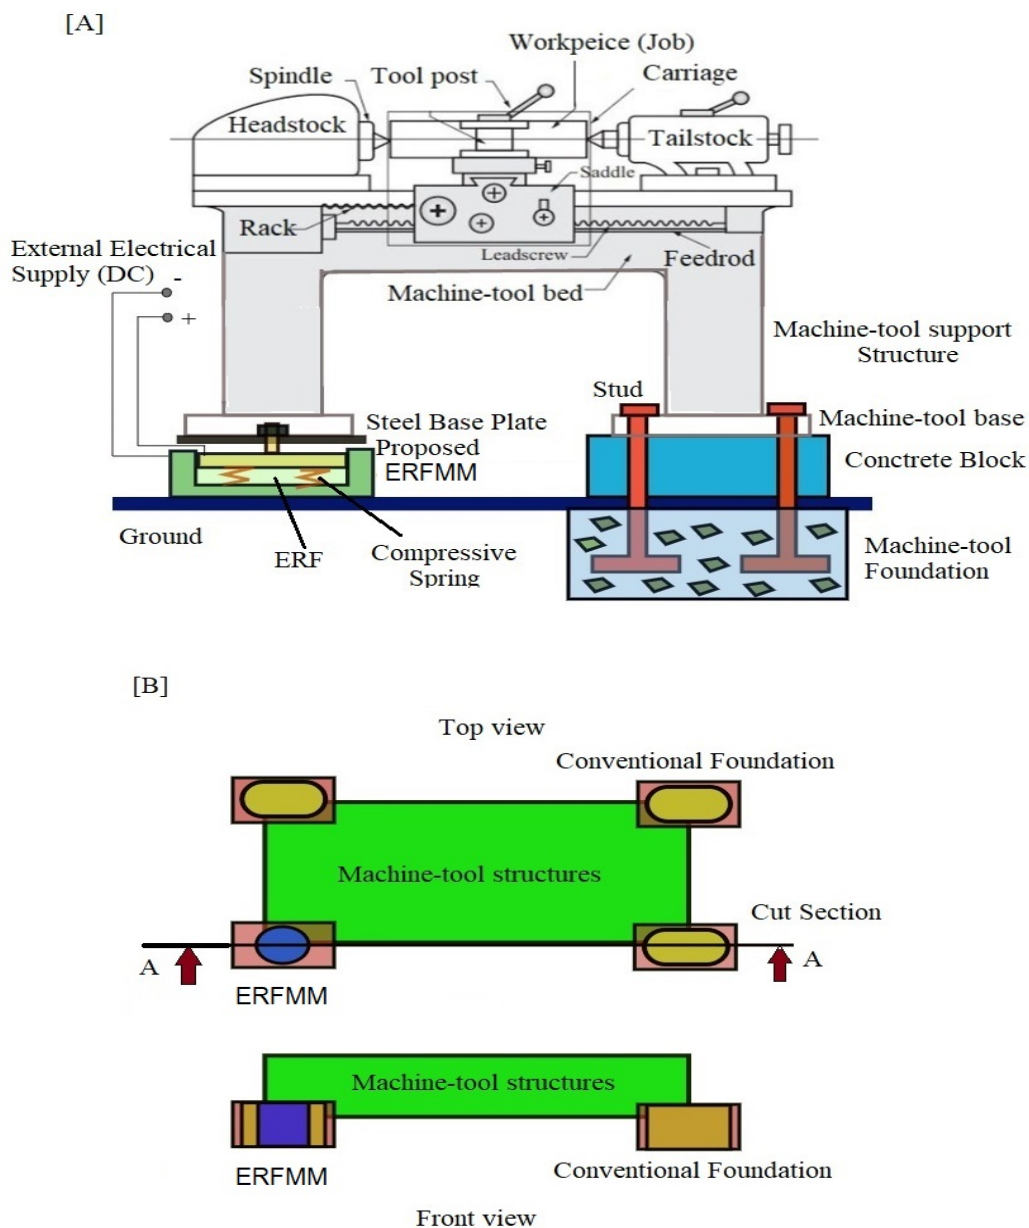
[A] Schematics of lathe machine used in experimentation with ERFMM [B] Schematic front and top view of an experimental setup
